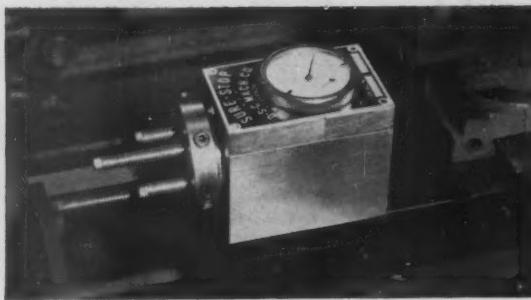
D-S-C "Sure-Stop" developed for use on lathes
